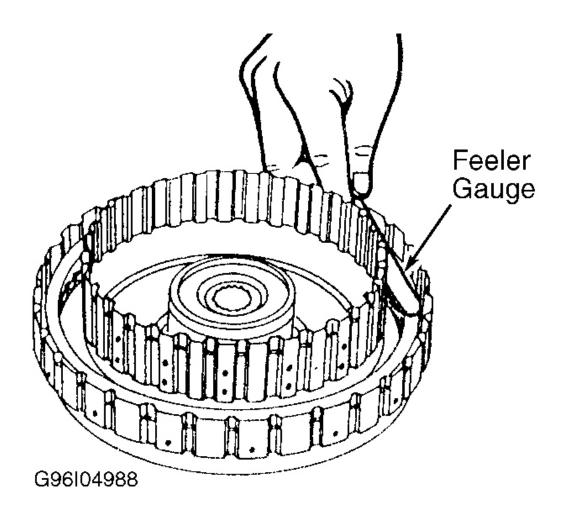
Measuring Reverse Clutch Clearance Courtesy of MAZDA MOTORS CORP.
